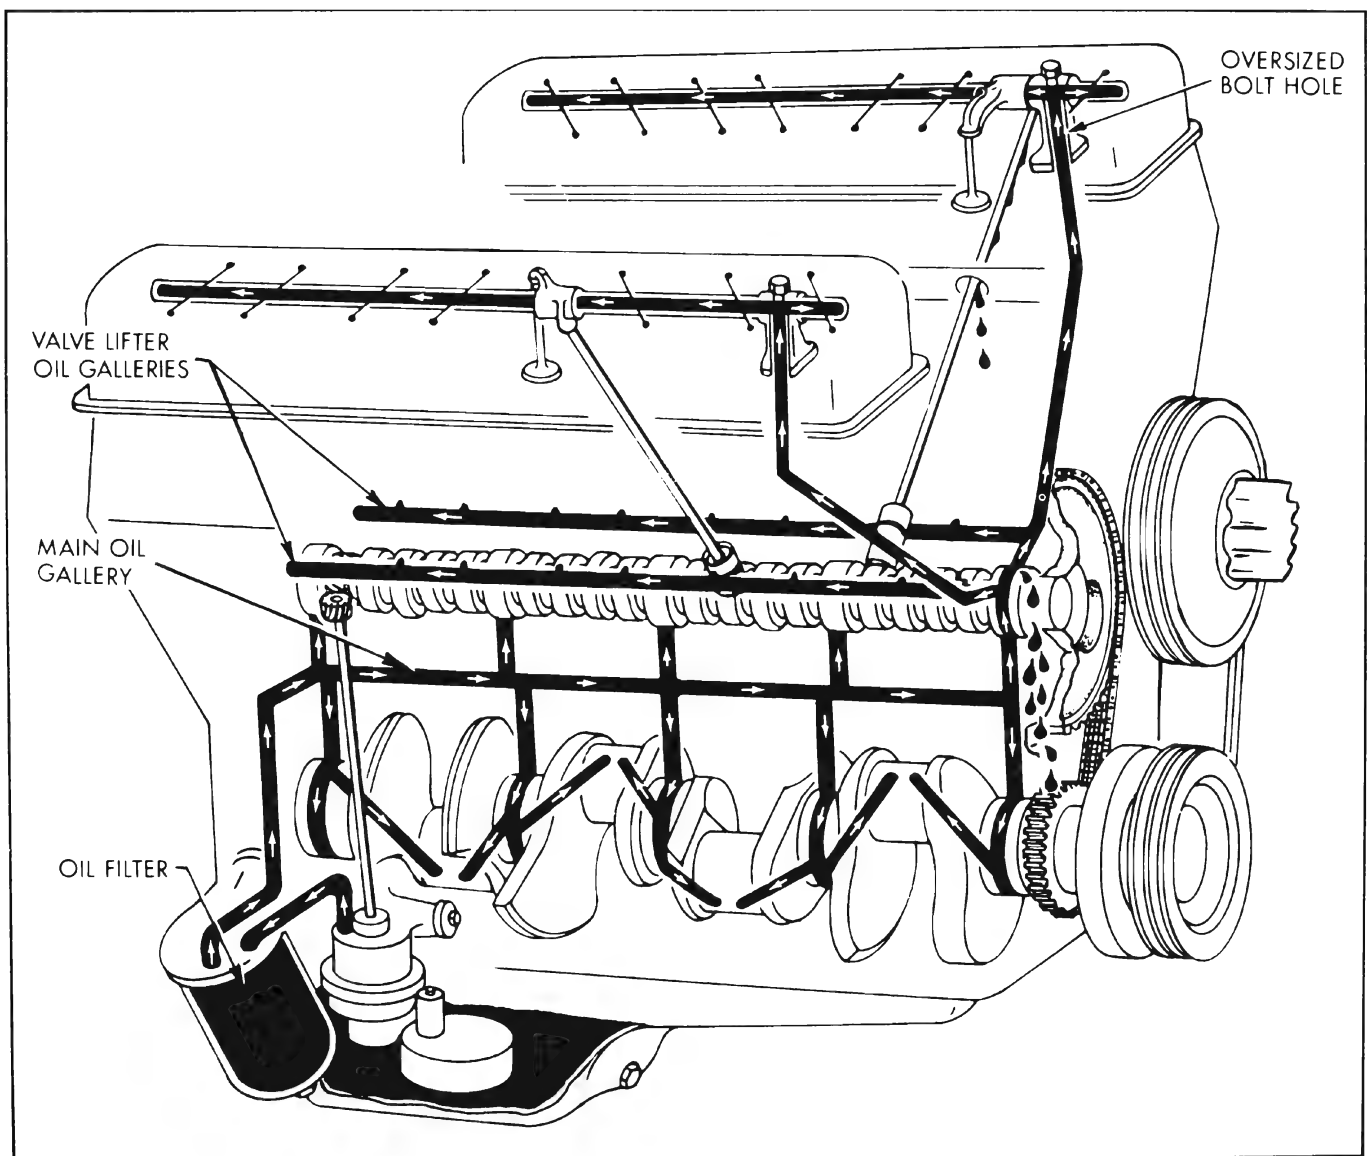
Schematic Diagram of Engine Oil Flow (401 & 425 Cu. In. Engines)
